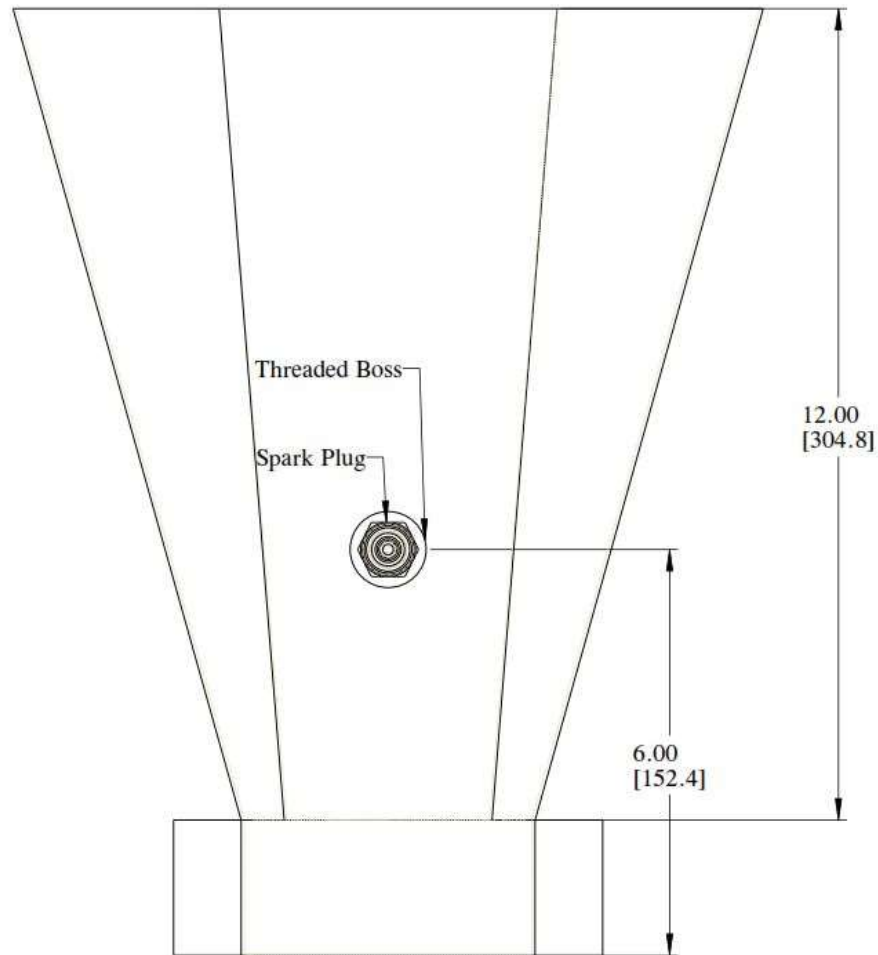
Location for Welding Threaded Boss to Cone
